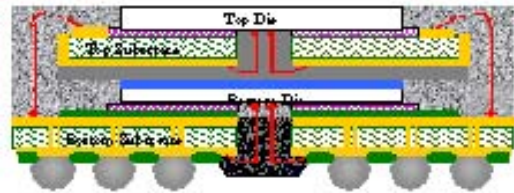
2DD2-wCSP package structure with both dice facing package bottom direction
